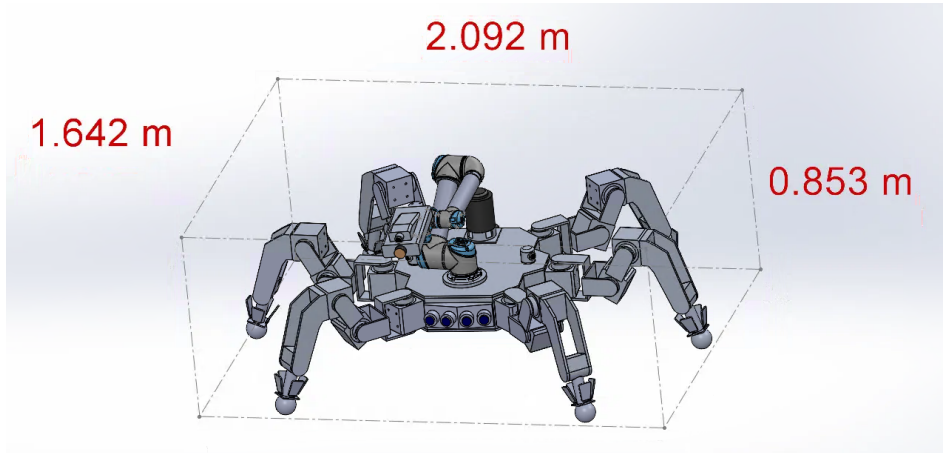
LSRH Design with Dimensions, Standard Configuration
